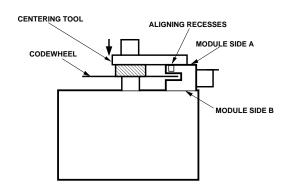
Alignment Tool is Placed over Shaft and onto Codewheel Hub. Alignment Tool Pins Mate with Aligning Recesses on Module.
